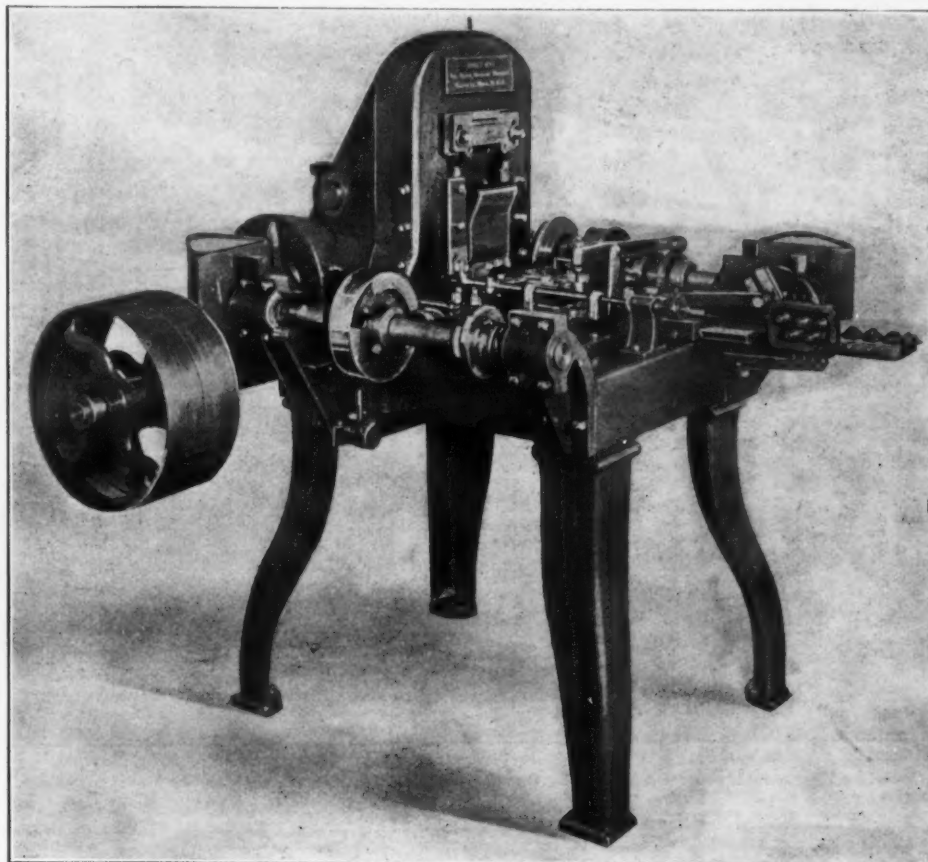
Wire Forming and Stamping Machine, Built by the Baird Machine Company, Oakville, Conn.
